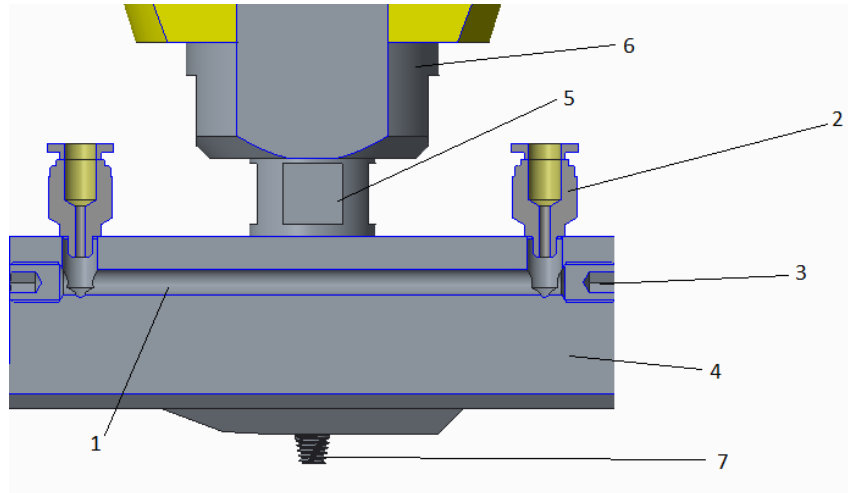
A cross-section of a single cooling channel in the SSFSW tool module design
